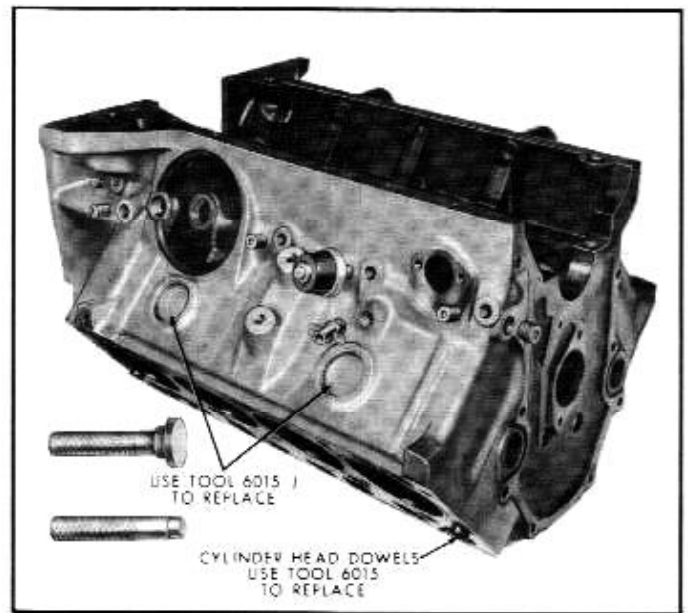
A-70—Tools for Cylinder Block Plugs and Fittings
